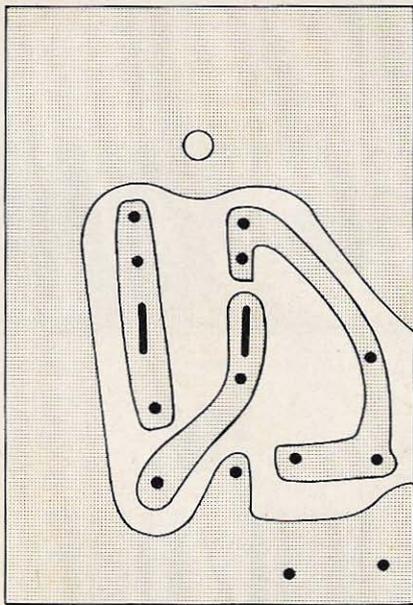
42% printed circuit layout; refer to the schematic and picture for parts placement.
